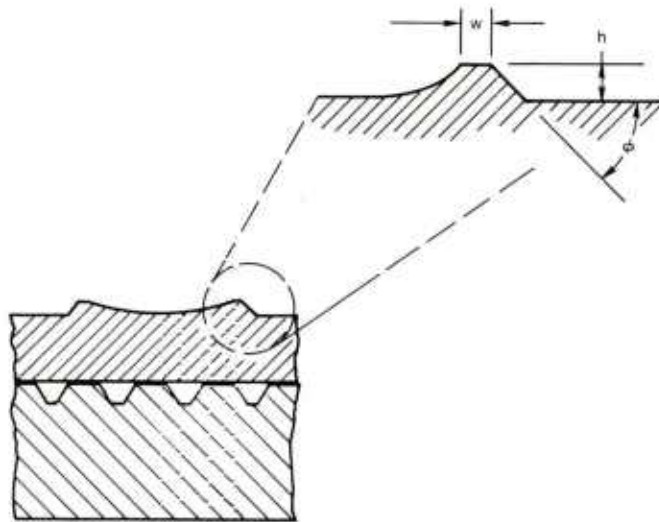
Section Through Roll-Forge Die Showing Flashland Design
